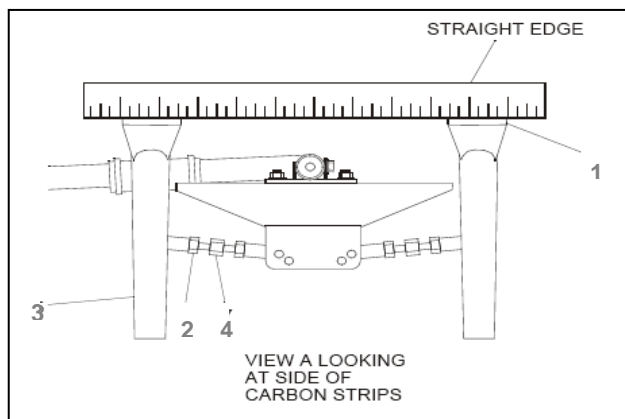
Straight edge tool and components: Carbon strips (1), Hex nuts (2), Pan head (3), and Turnbuckles (4)
